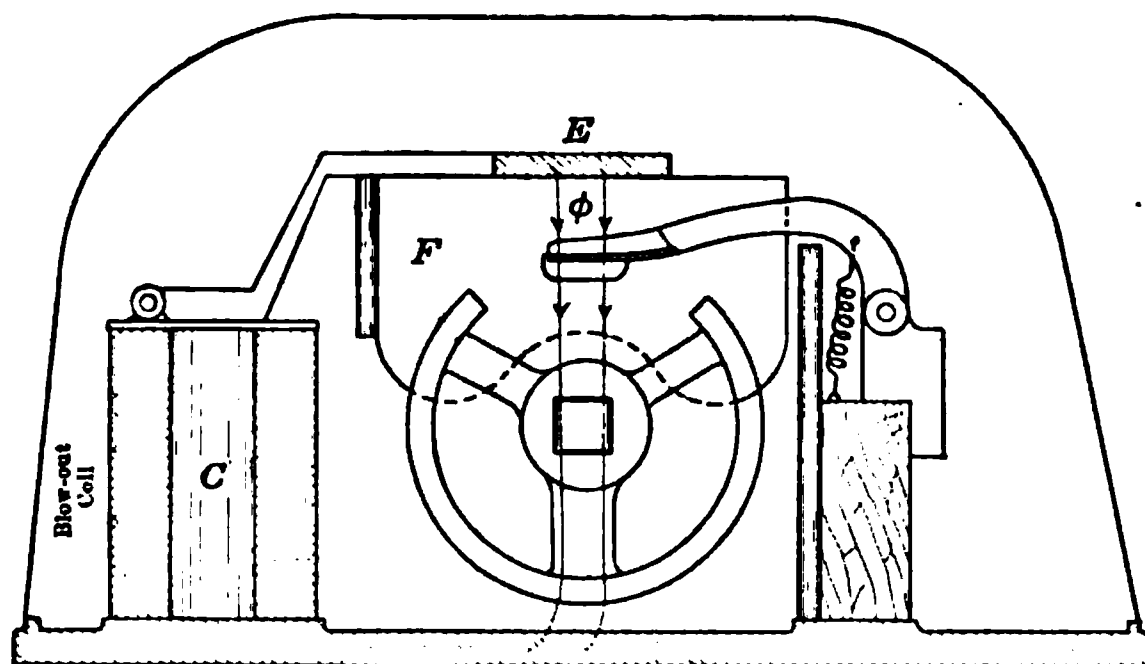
Section through drum type of controller, showing the blow out coil.
